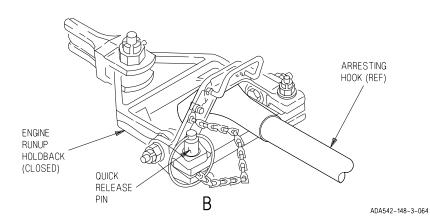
Engine Runup Holdback Adapter P/N 53E030001-301 (Sheet 3)
